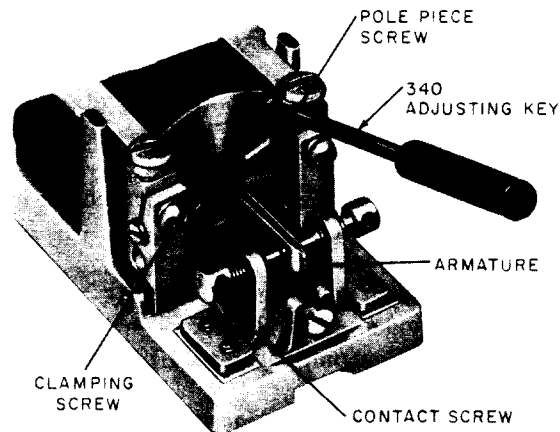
Method of Adjusting Pole Piece Screws (Old Style Illustrated)
